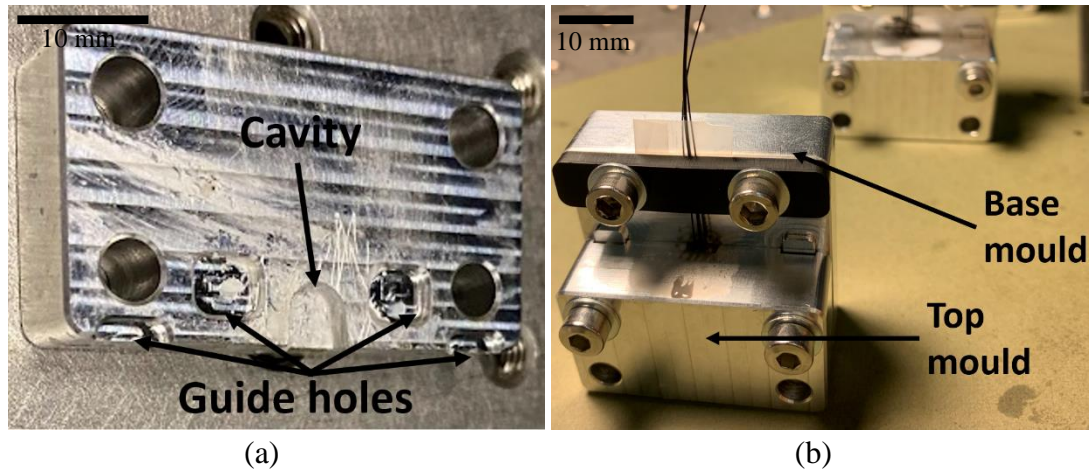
(a) Top sensor mould and (b) combined moulds.
